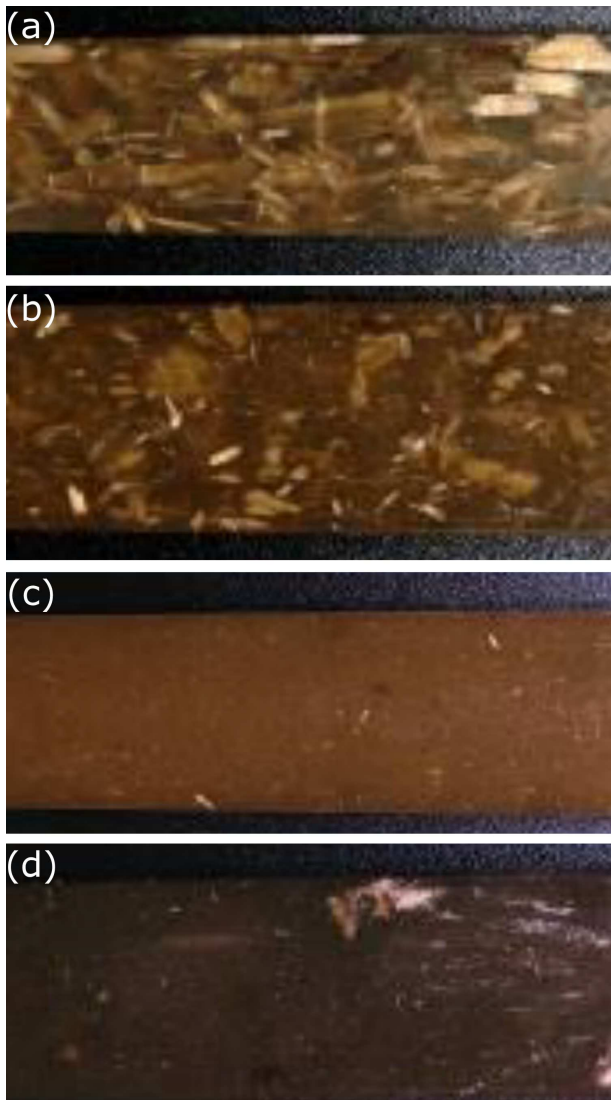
Comparison of the surface and size of the filler for the materials studied. (a) Primary molded piece (hemp hurds), (b) molded piece after recycling (hemp hurds), (c) molded piece (hemp hurds pulp), (d) molded piece (hemp straw pulp).
